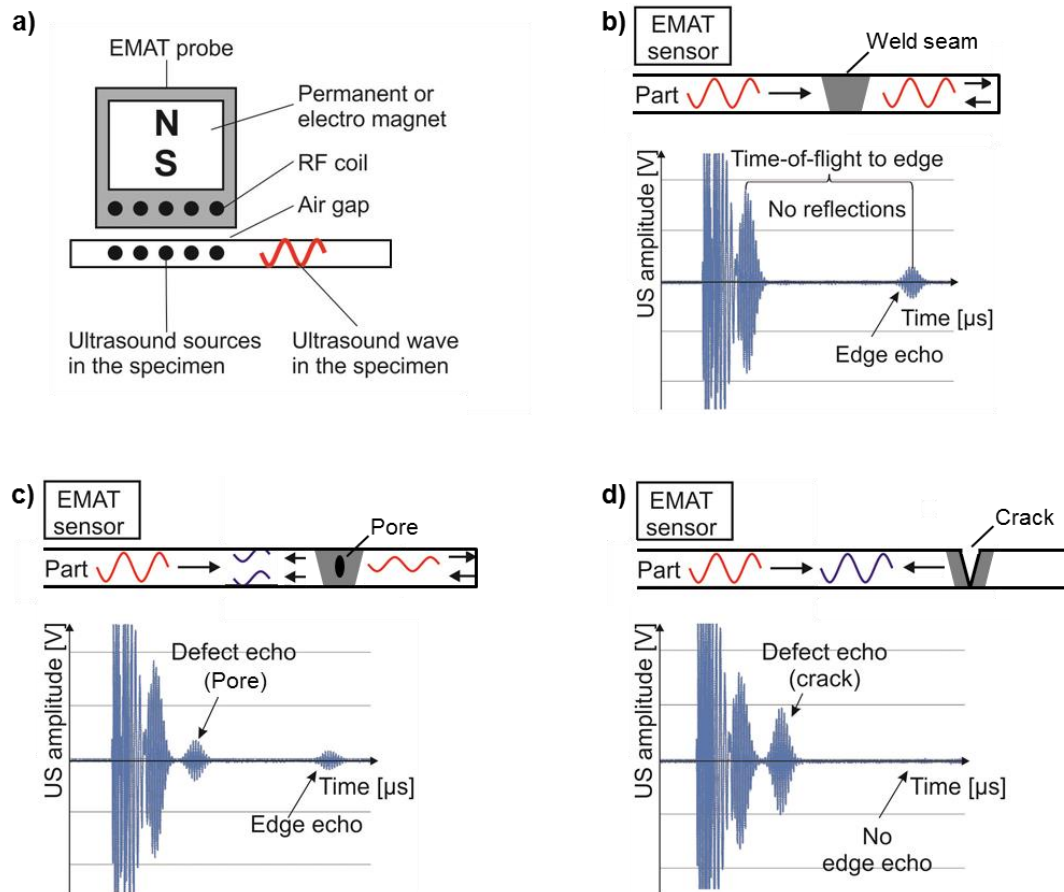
Schematic illustration of the detection of defects in weld seams by EMAT; a) physical principle, b) signals of a faultless weld seam, c) signals of a defective weld seam, d) signals of a weld seam with complete material separation.
